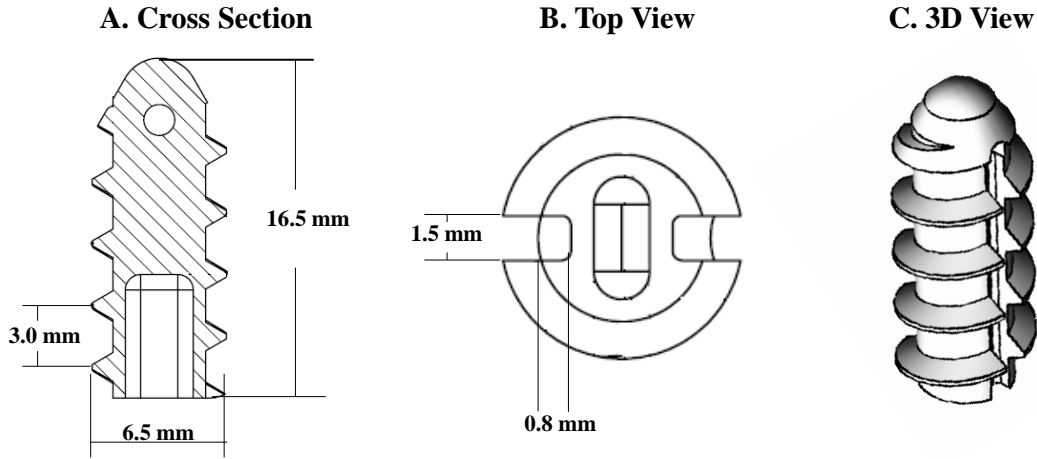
Schematic of design of Mg-based suture anchor. A: Cross sectional view showing length and diameter, as well as thread pitch. B: Top view showing dimensions of the suture track. C: 3-dimensional view of suture anchor showing the thread and suture track.
